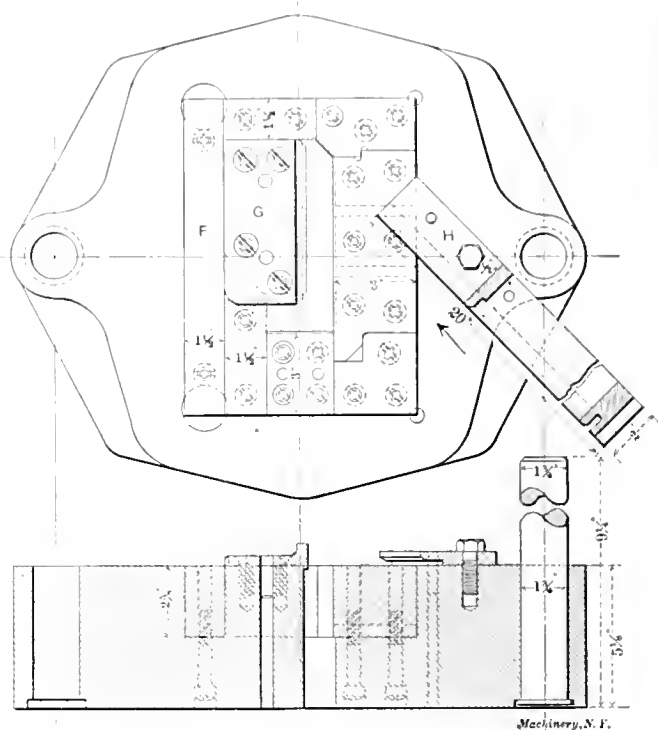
Section and Plan of a Die for producing the Blank, Fig. 1
